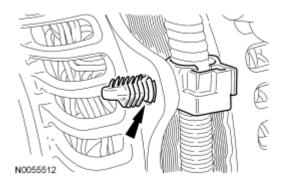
Locating Generator Electrical Connector Courtesy of FORD MOTOR CO.
